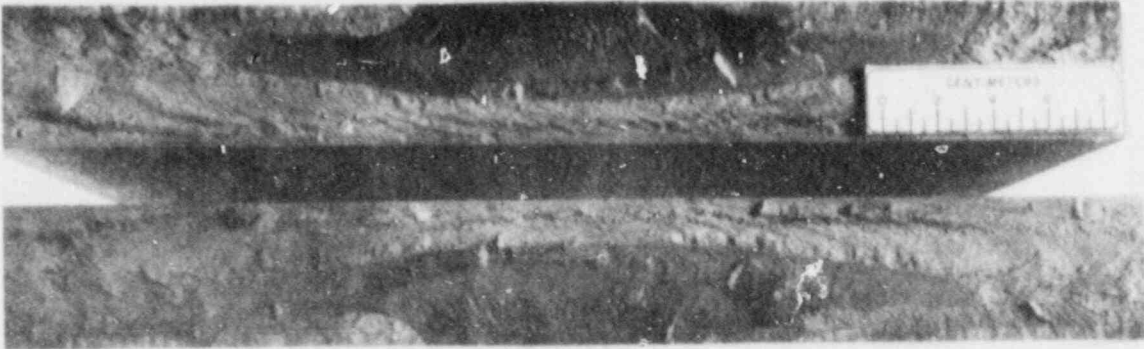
Macrograph of fracture surface of clad plate CP-15.
